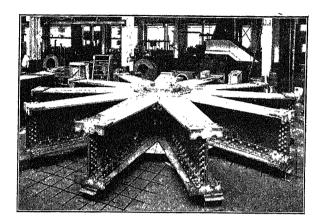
Assembling Rotor Spider for Conowingo Generator
